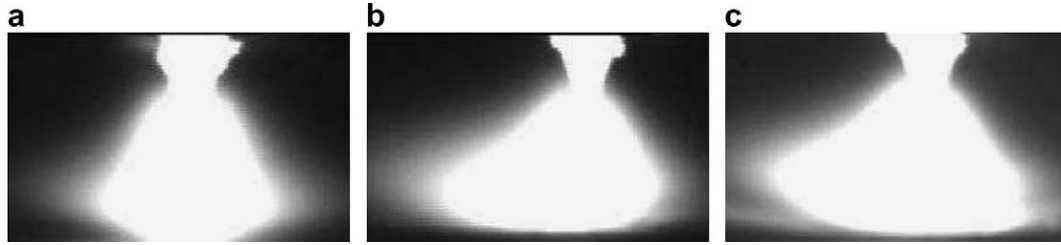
Arc side views in TIG welding (a) A-TIG welding ($t = 50 \mu\text{m}$) (b) and A-TIG welding ($t = 220 \mu\text{m}$) (c).
